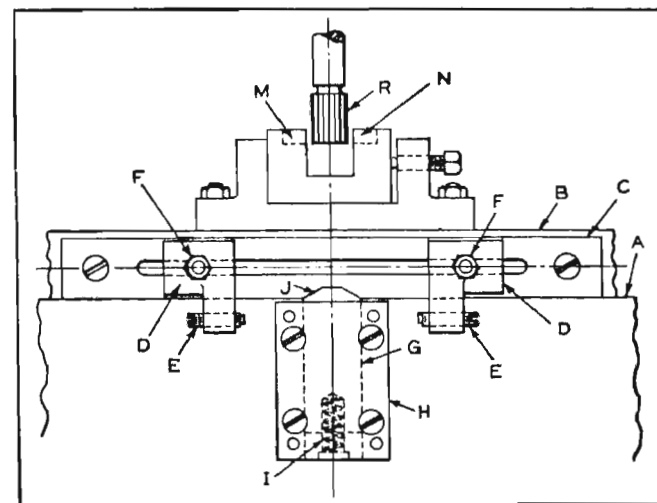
Milling Machine Equipped with Mechanism for Locating Table in Correct Position for Loading.
